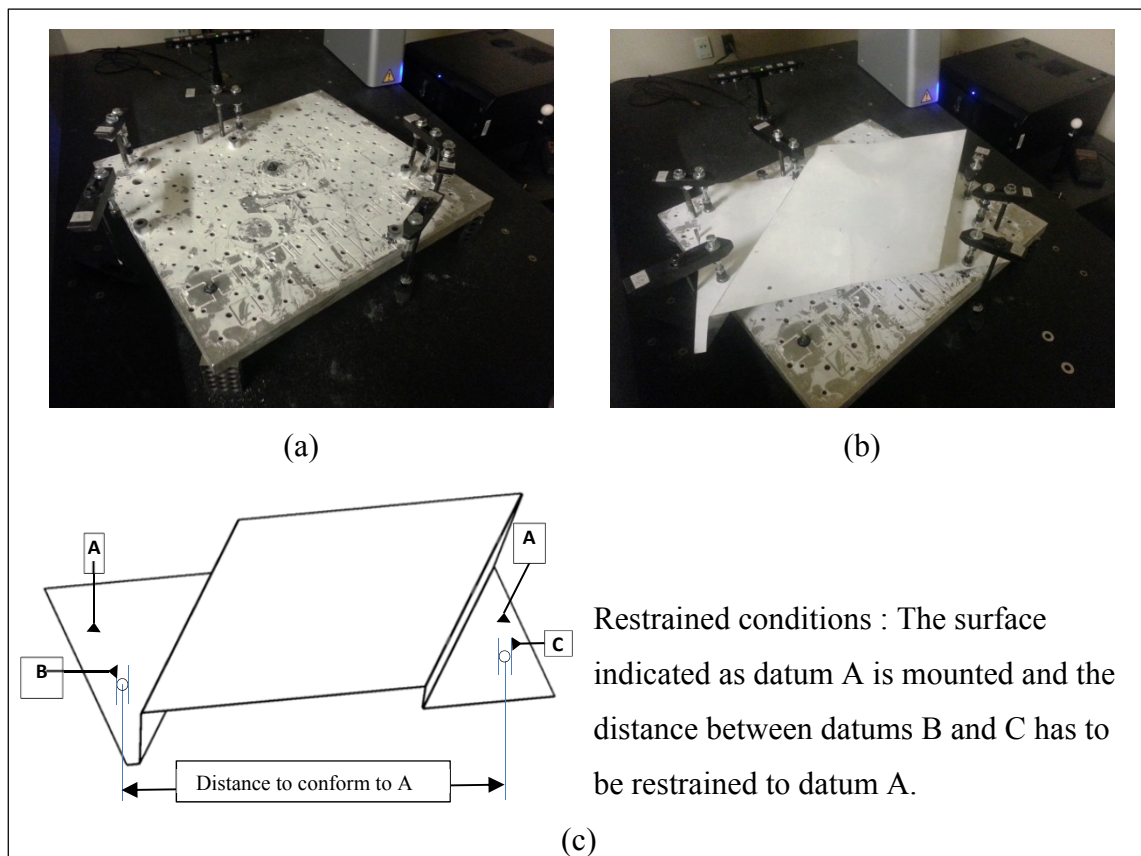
The experimental case study- (a) The specialized inspection fixture designed to conform the part (b) The part restrained on the fixture (c) GD&T description of the test panel.
